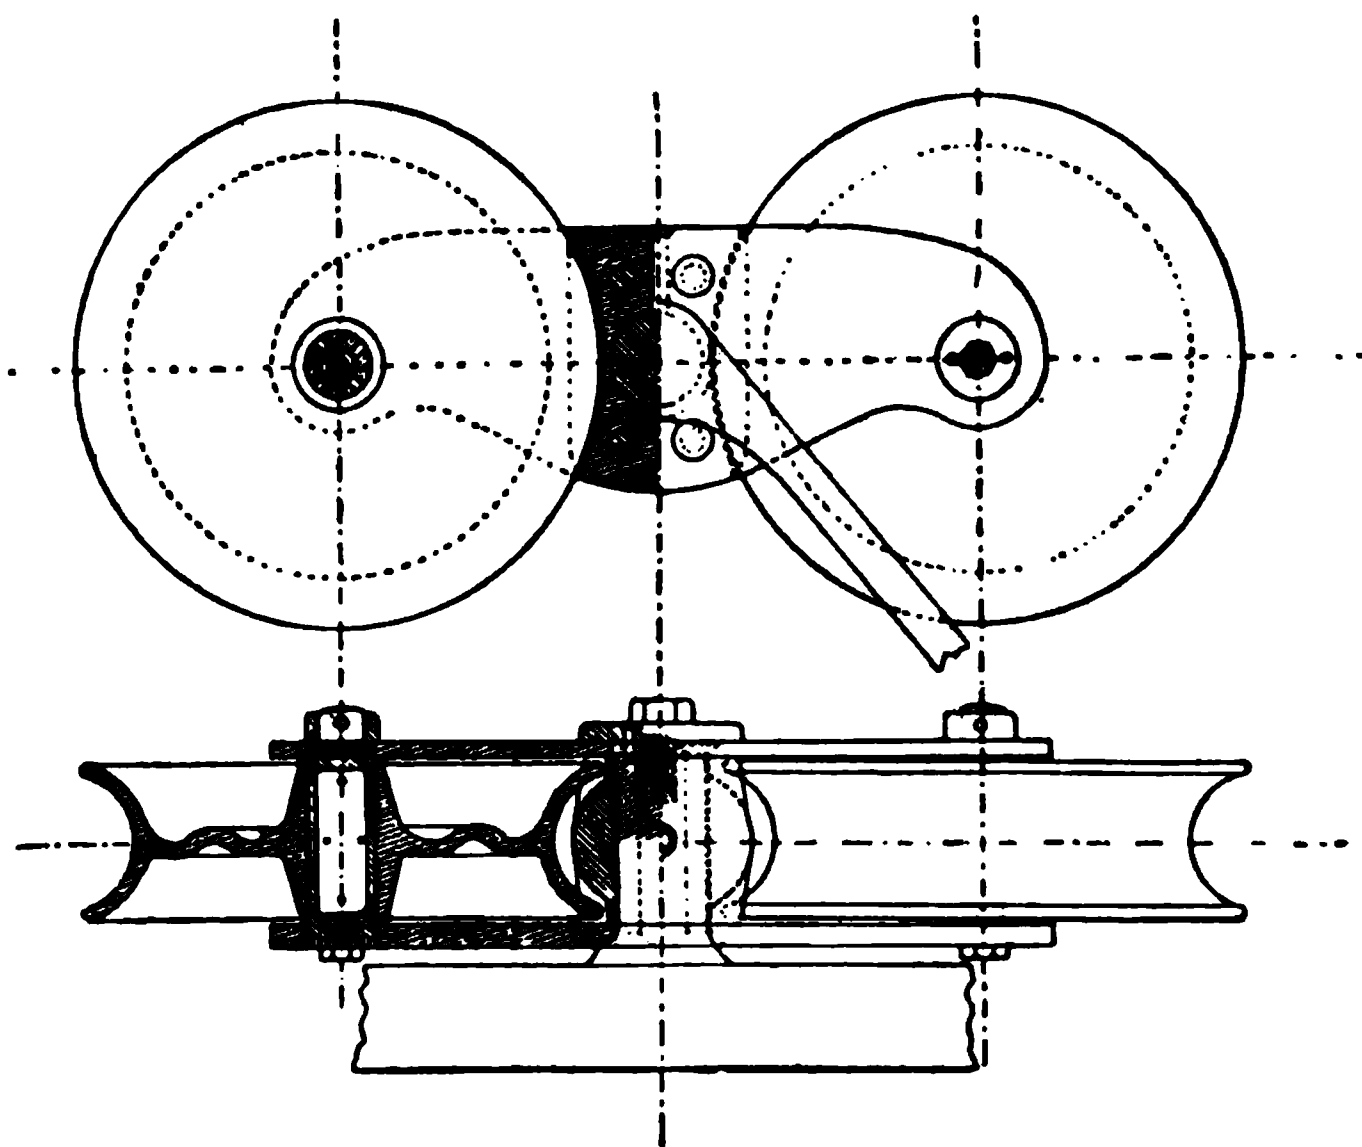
PLAN AND SECTION OF TRUCK OR RUNNER OF AERIAL ROPEWAY.
